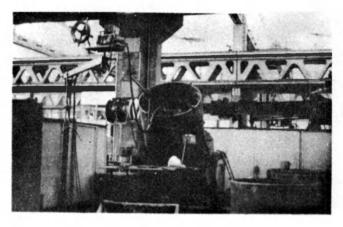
CIRCULAR WELDER - JOB ROTATED
